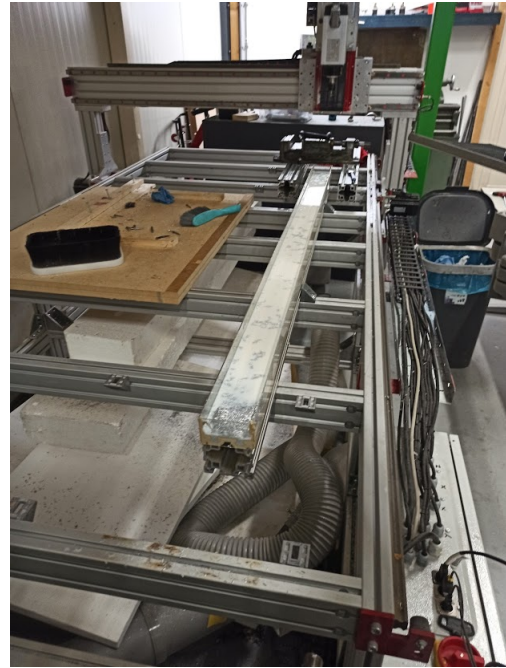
Cooling bath on the CNC portal mill used to mill the aluminium clamping strips
